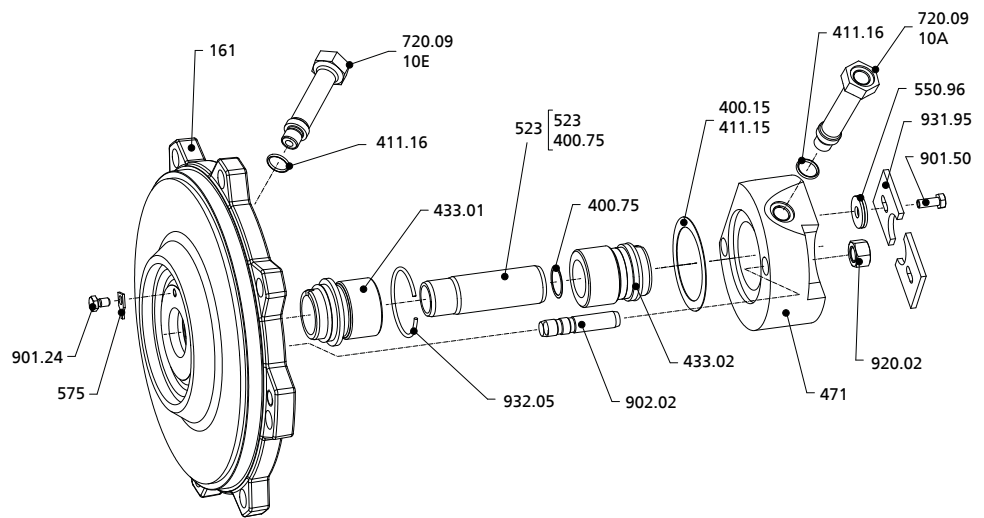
Variant with double mechanical seal in back-to-back arrangement
